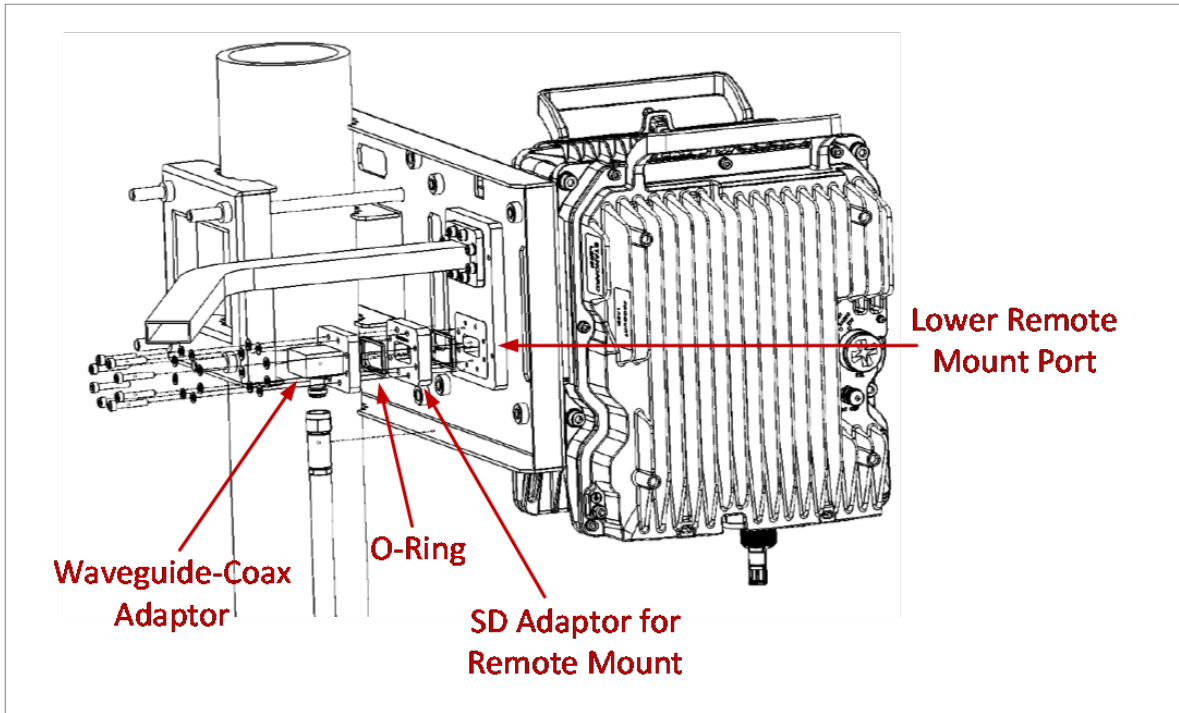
LDF4 Cable to Remote Mount Adaptor – 1+0
